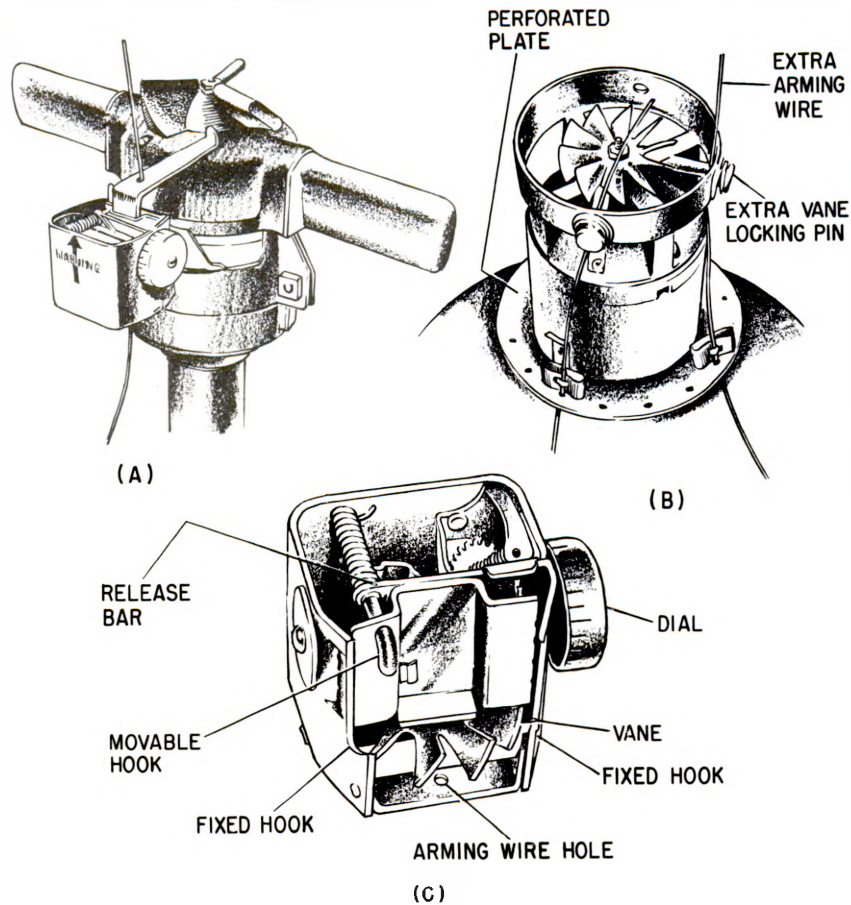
(A) Arming Delay M1A1 installed on bar type fuze; (B) Arming Delay M1A1 installed on ring type fuze; (C) Arming Delay M1A1 detail.
